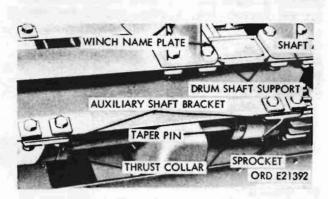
V-17A/MTQ rear winch auxiliary shaft and auxiliary shaft sprocket
